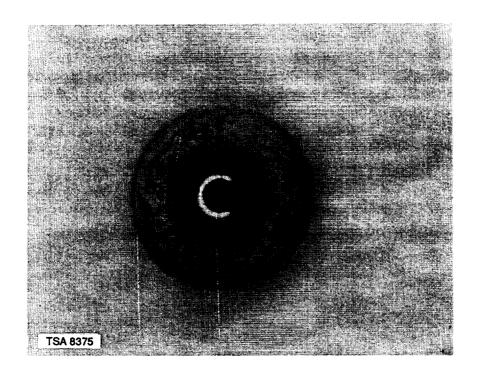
Bearing No. 1004, Ball Surface, 25X Magnification (4/10/91).
